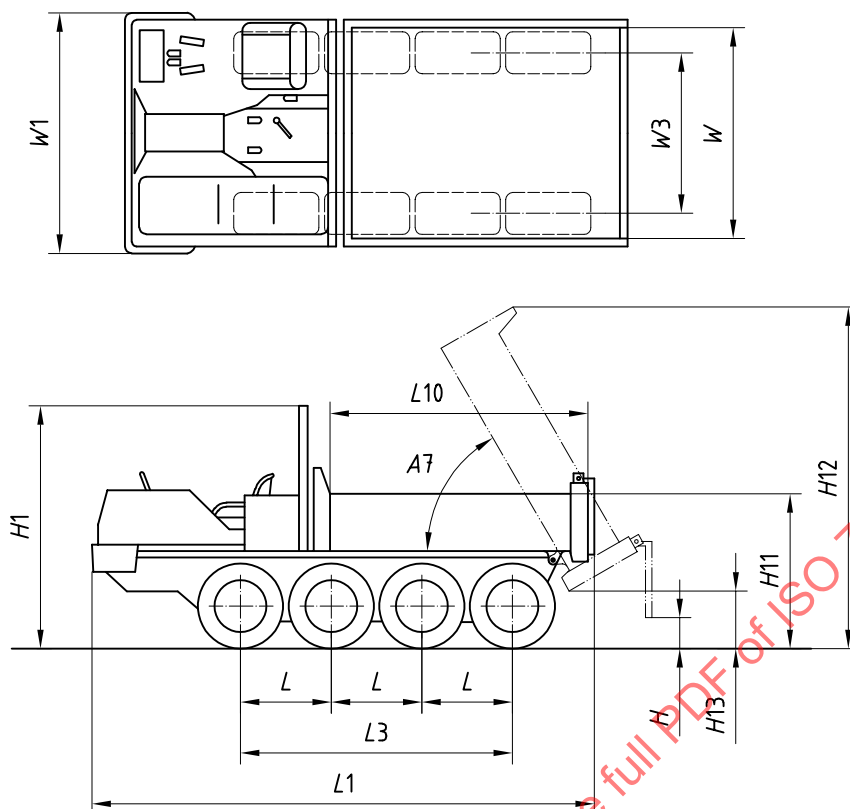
Dimensions of wheeled compact dumper — Eight-wheel
